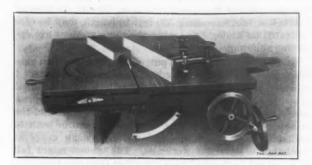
The Setting of the Saw for Cutting Core Boxes.
